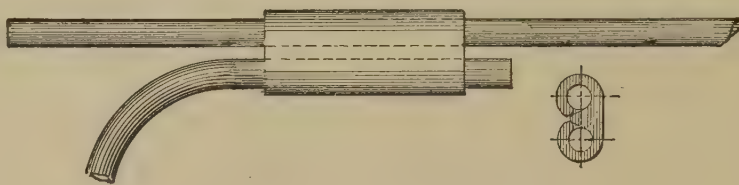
COUPLER FOR CONNECTING WIRES.
